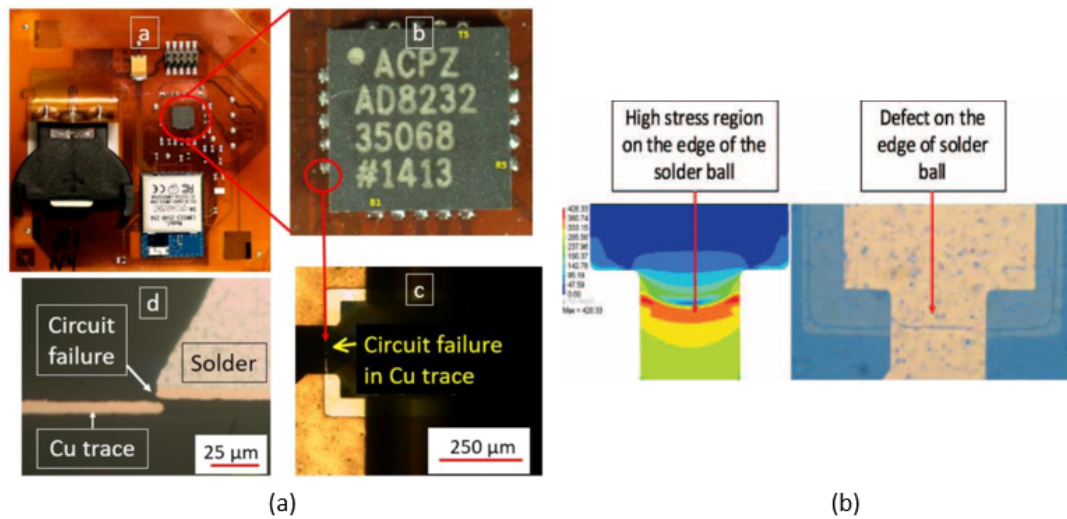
Formation of solder joint defect due to bending.
